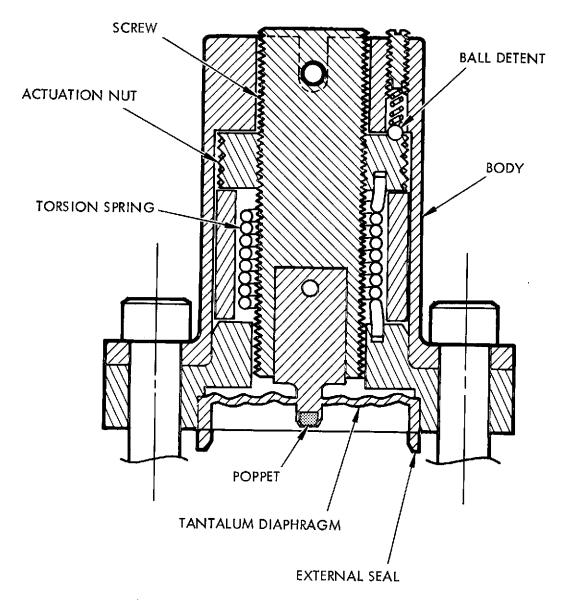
Tantalum Diaphragm Hand Valve Layout
